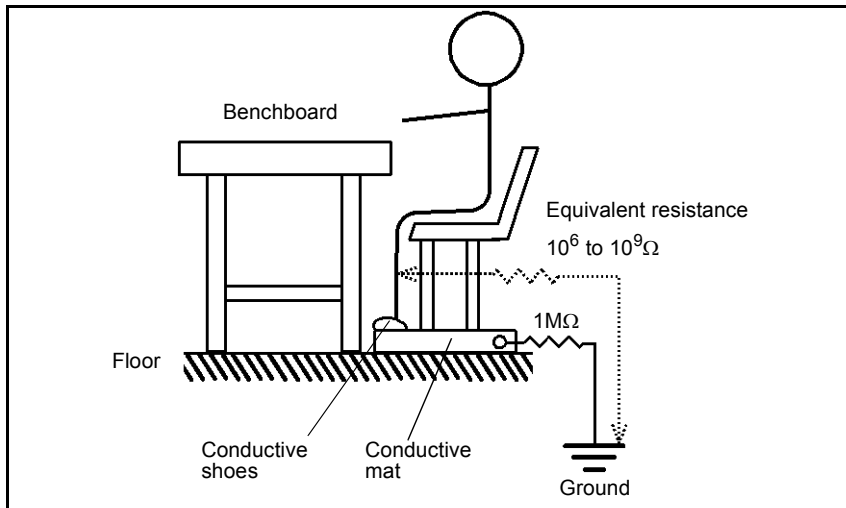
Countermeasures for Static Electricity of Work Site Floor
